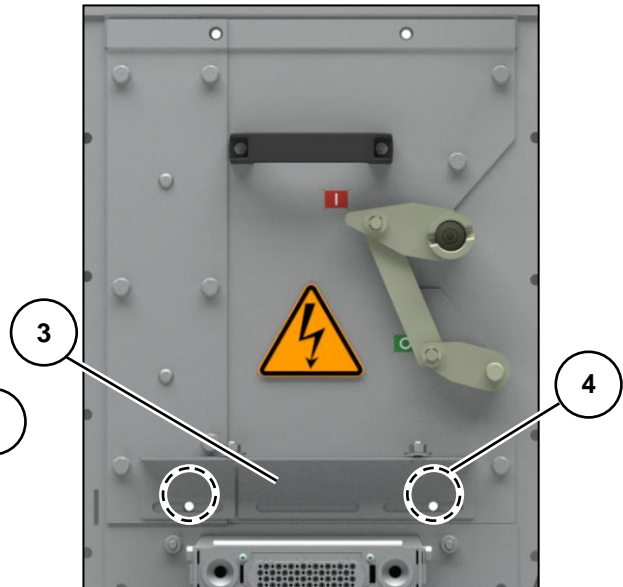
Contactor panels with panel width 435mm only: 2 Bolted joints on the heater support
